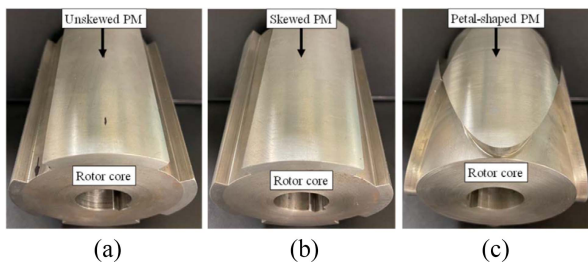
Photographs of the prototype of rotor with cold-spray NdFeB PM fabricated by AM. (a) Without skew. (b) Conventional linear skew. (c) Proposed sinusoidal-petal-shaped PM [32].
